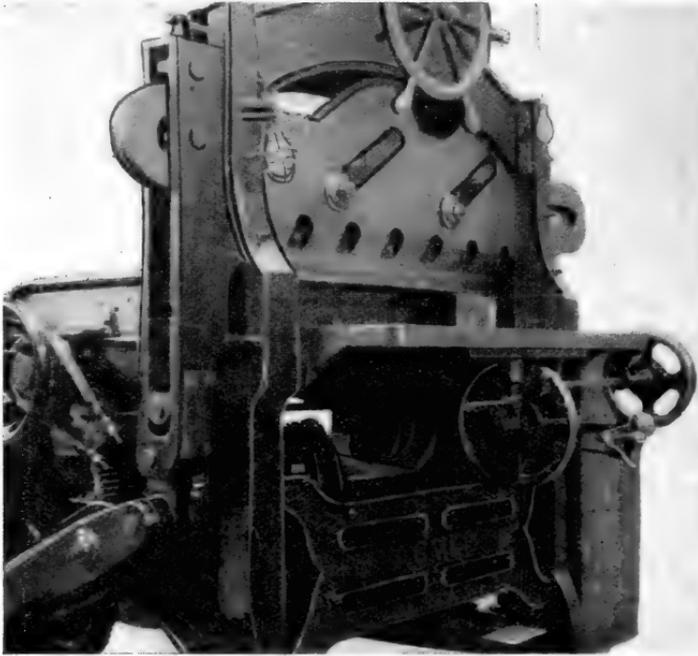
Power Shears for cutting Sheet Steel prior to punching Armature Core Plates.
